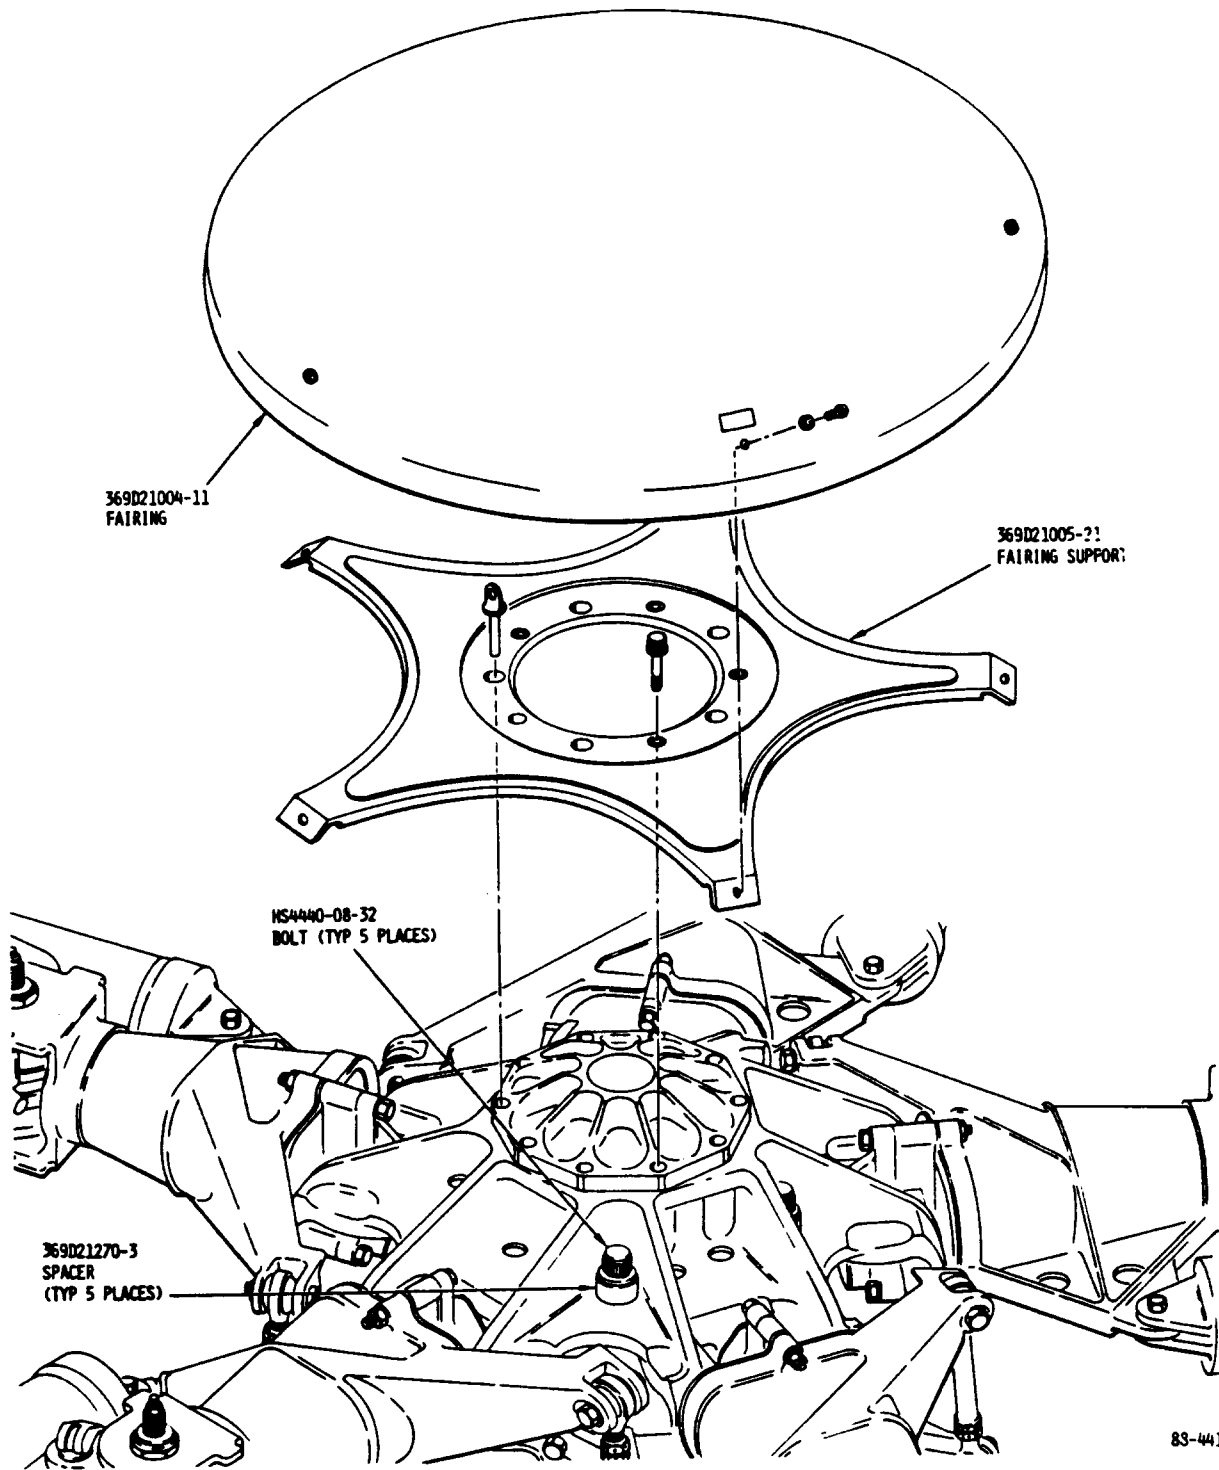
Removal and Inspection of Main Rotor Hub Strap Pack Retention Bolts and Bushings
